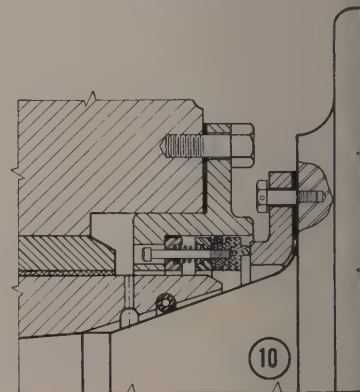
Back-up roll bearings showing vertical roll neck seal installed on a four-high mill
